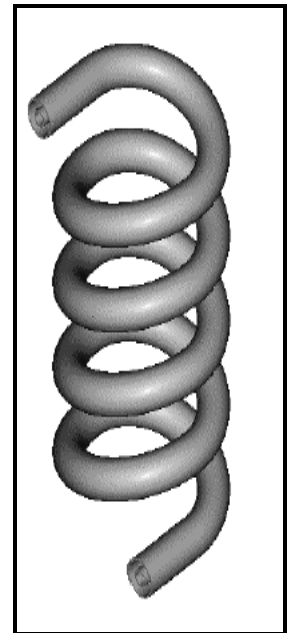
Tube-In-Tube Helical Coil Heat Exchanger
